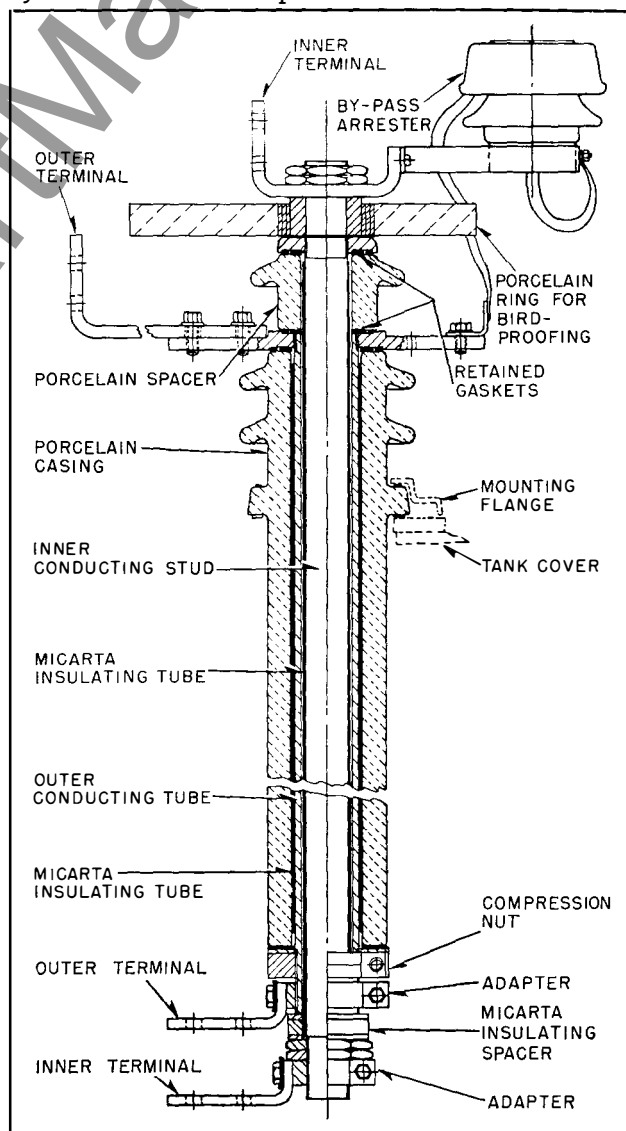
Concentric Lead Bushing with Bird-proofing for Type URS Step Regulator
